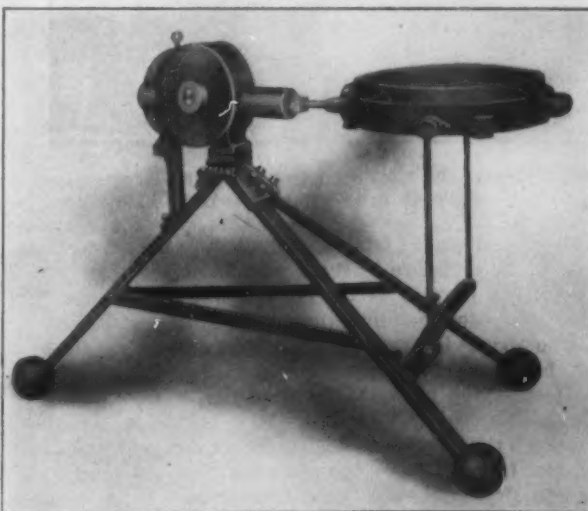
The Deane Motor-Driven Sand Riddler.
